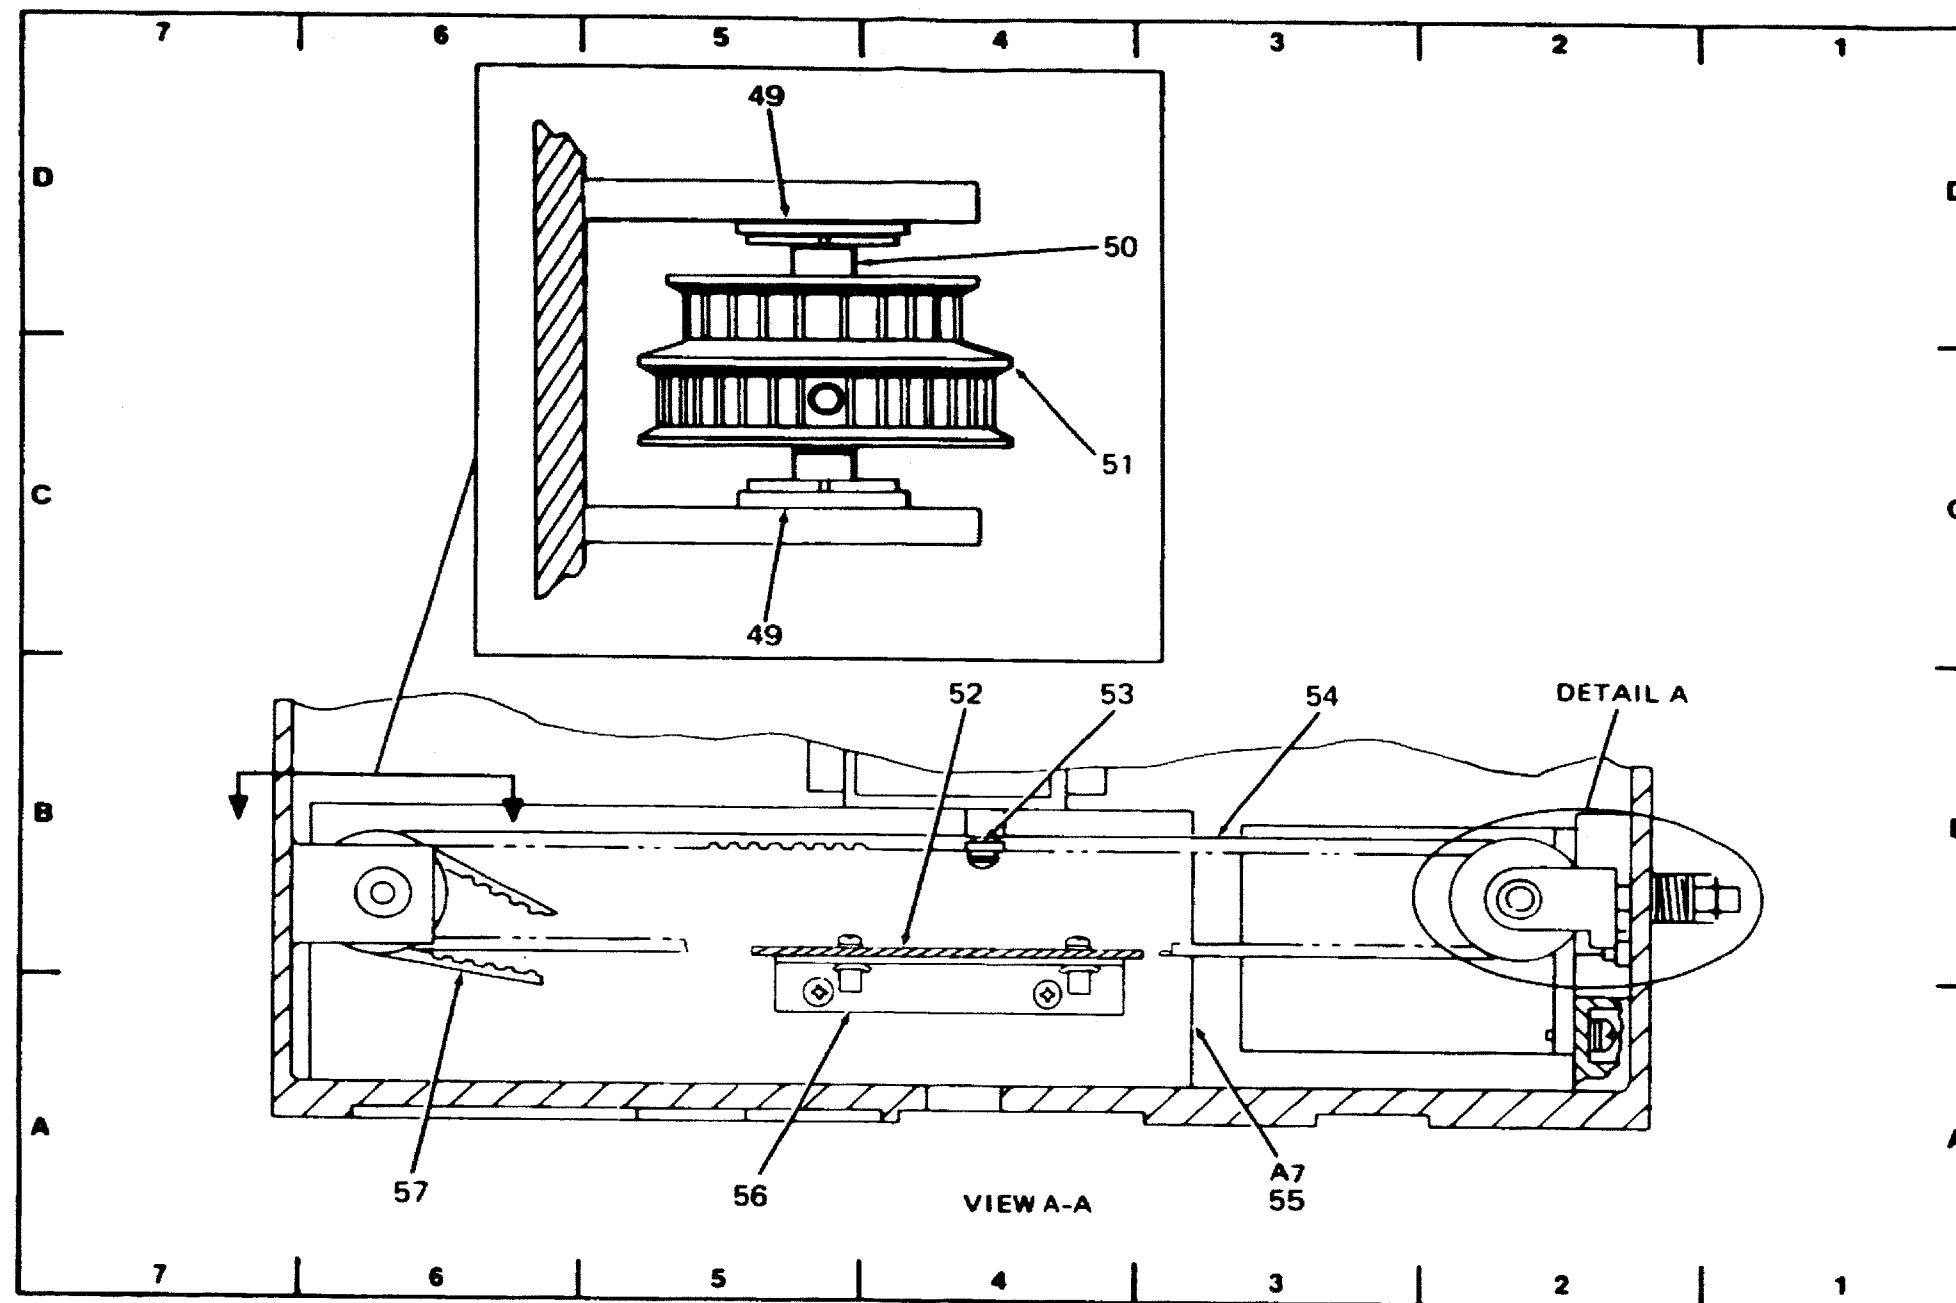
Teleprinter Subassembly (Sheet 5 of 6)
